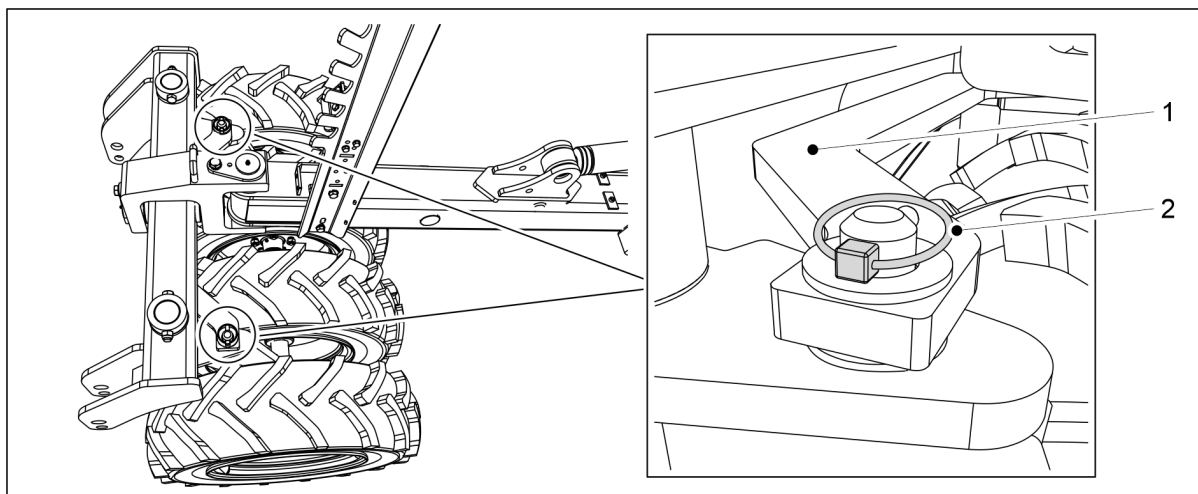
251. Detaching the wheel packer bar
